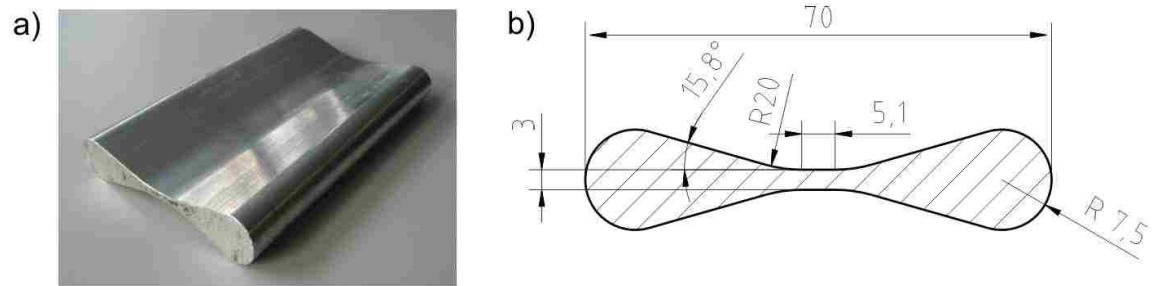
(a) General view of the extrusion specimen (b) Cross-section of the extruded profile
